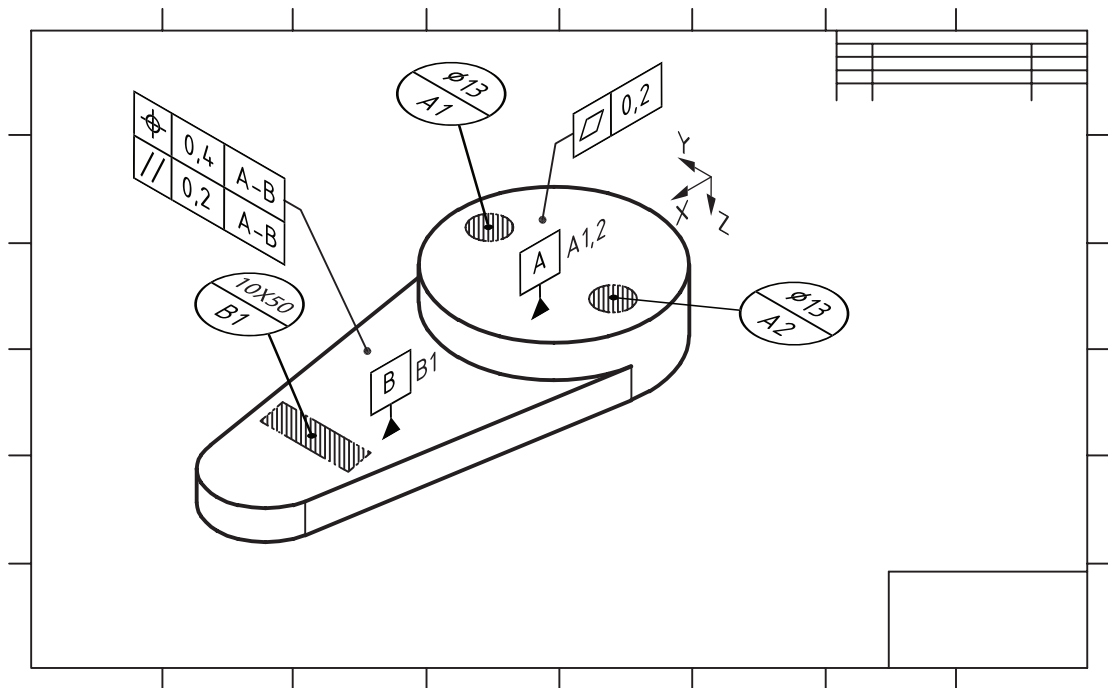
Datum targets and indicators in an axonometric view
